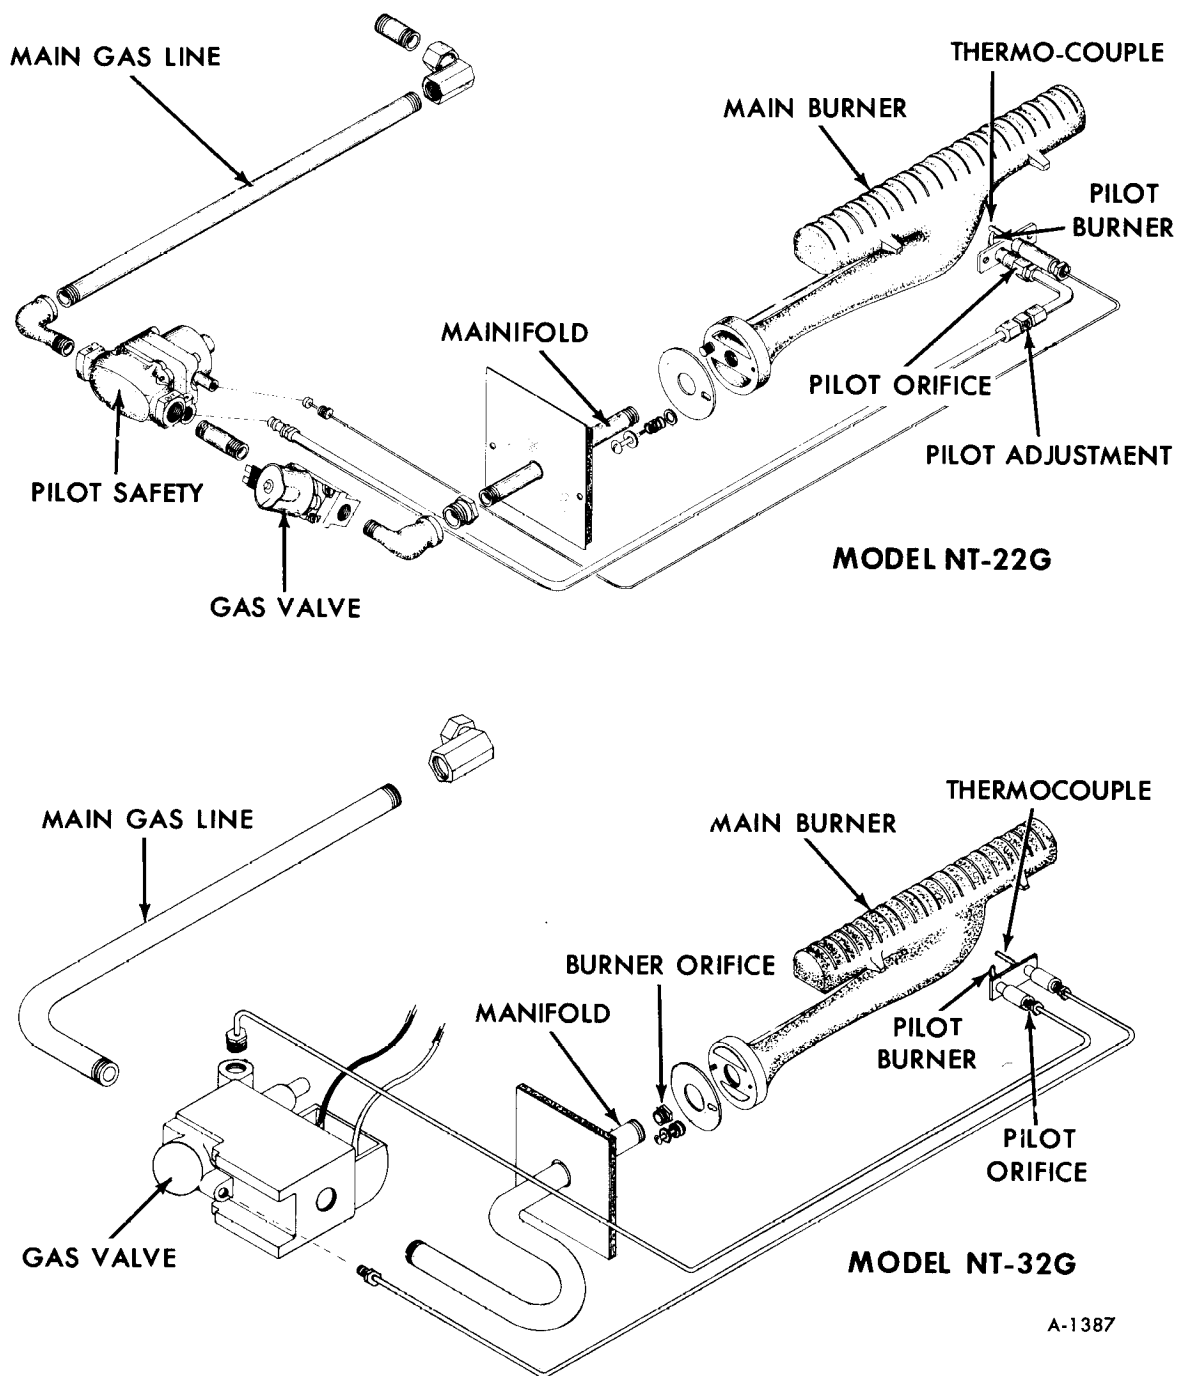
(NT-22G and NT-32G) Valve and Burner Assemblies
